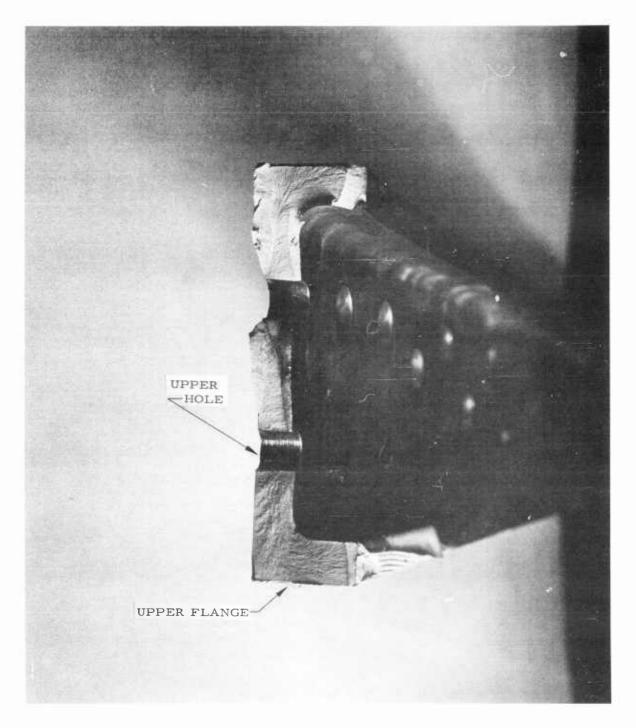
Rear Spar Fracture Area -- Inboard Portion
